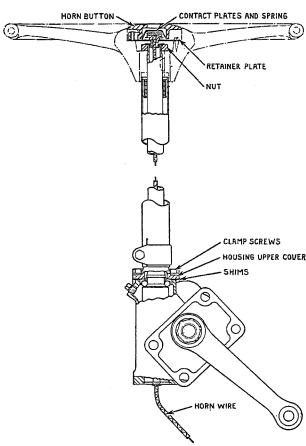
, RT-14, RT-21, RT-26 Steering Gears
